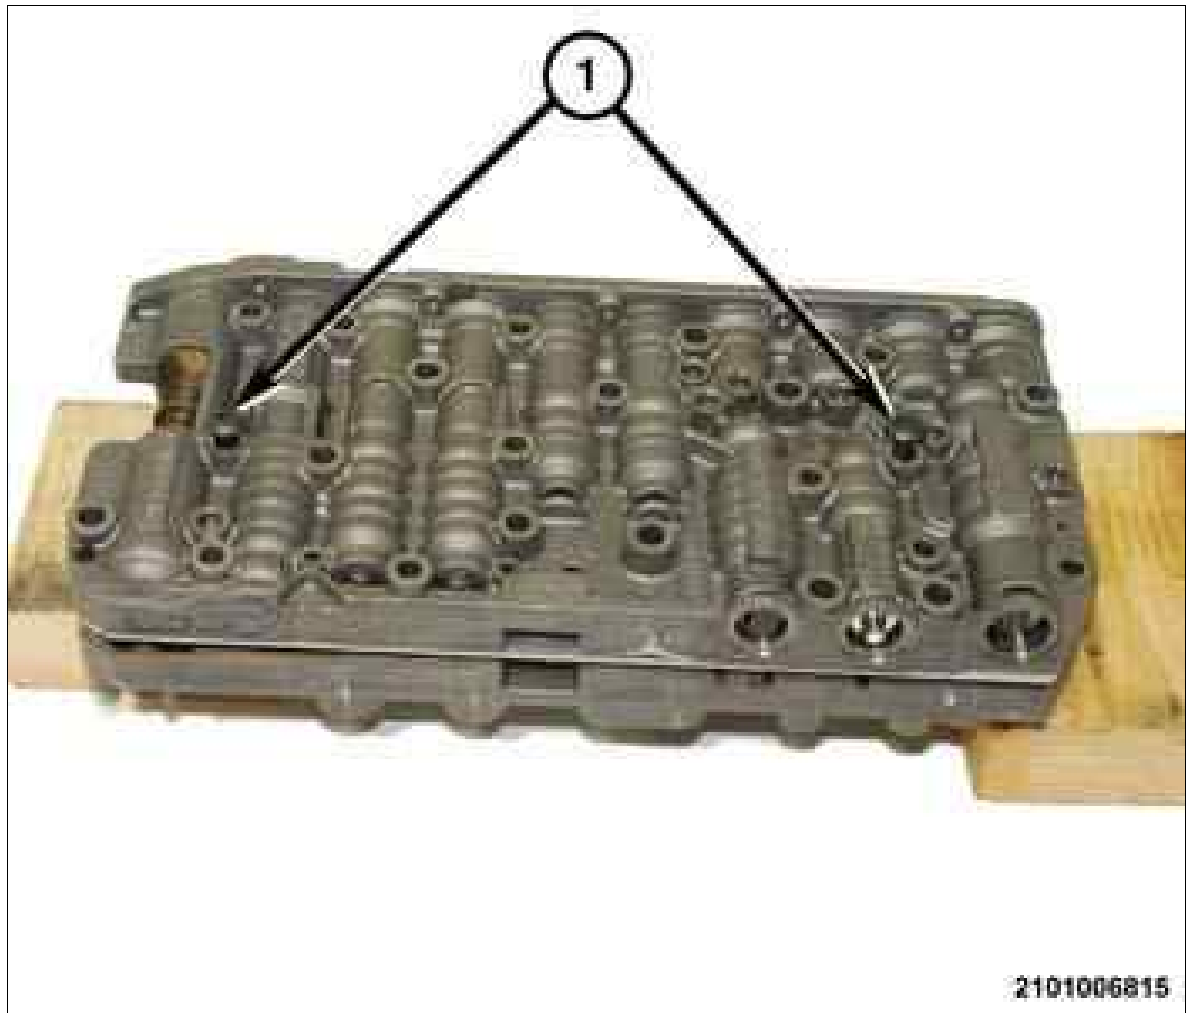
Outer Valve Body, Manual Valve, Guide Pins & Separator Plate
